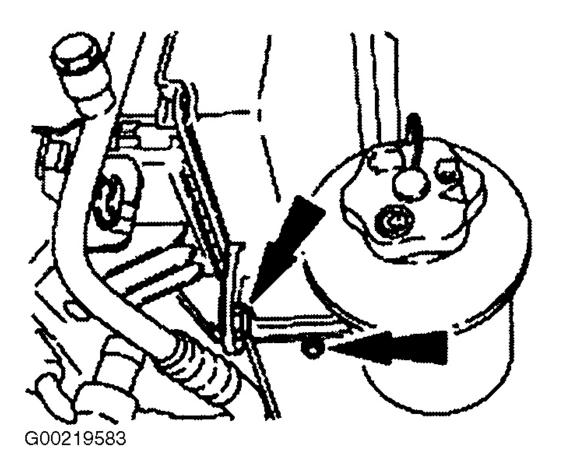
Removing/Installing Left Hand Upper Fan Shroud Bolt Courtesy of FORD MOTOR CO.
